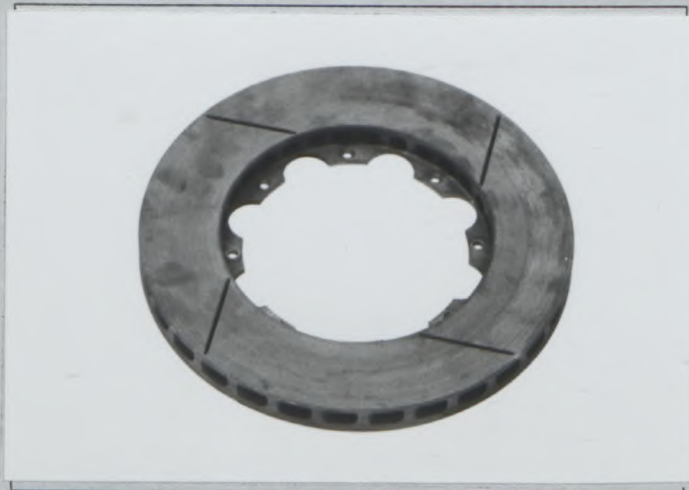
FRONT AND REAR BRAKE DISC, TYPE G&H
